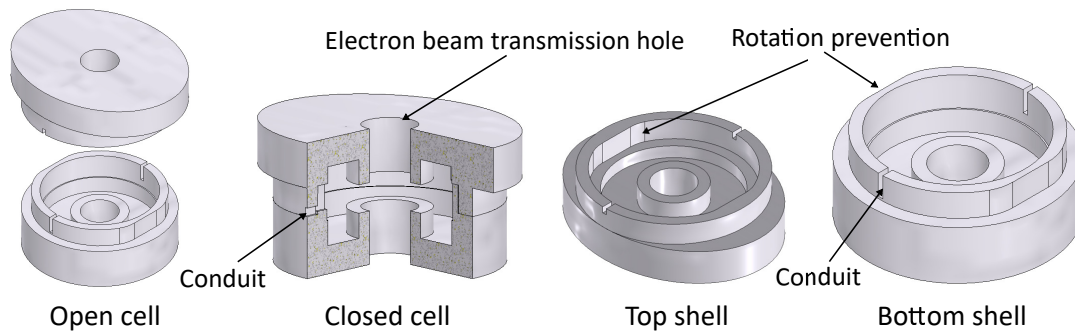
CAD drawing of the 4 mm *in situ* microplasma shells. Technical drawings with dimensions can be found in the appendix A.
